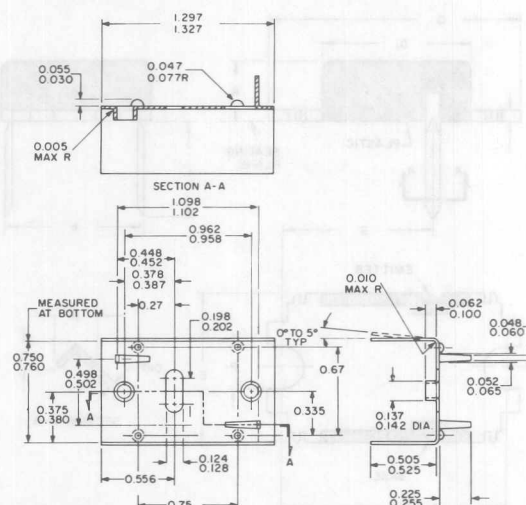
Integral heat sink used with the TO-220AA Versawatt package shown in Fig. 3.
